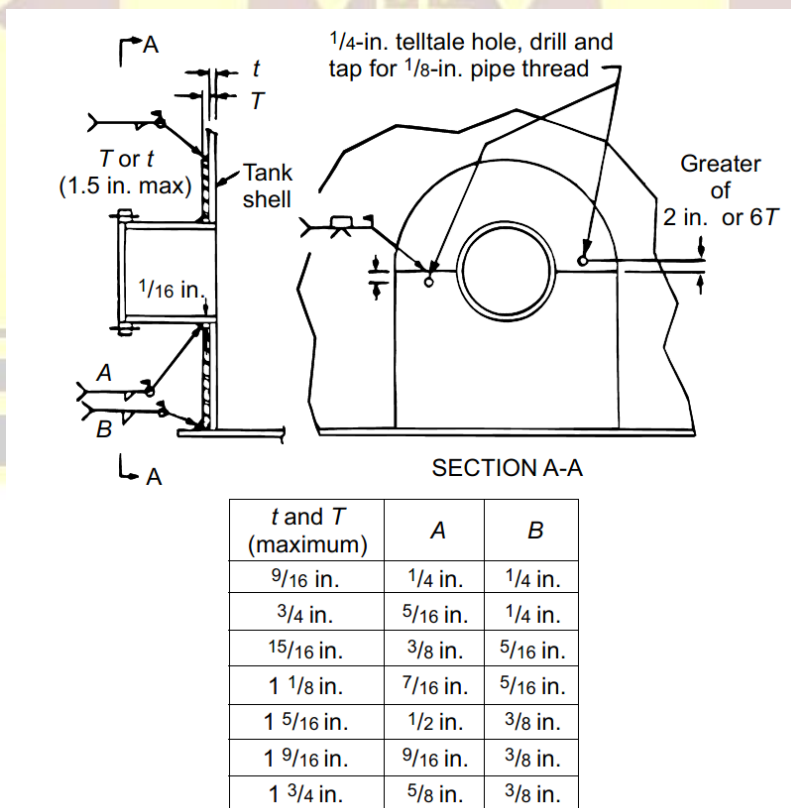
Typical Details for Addition of "Tombstone" Shape Reinforcing Plate to Existing Shell Penetration
